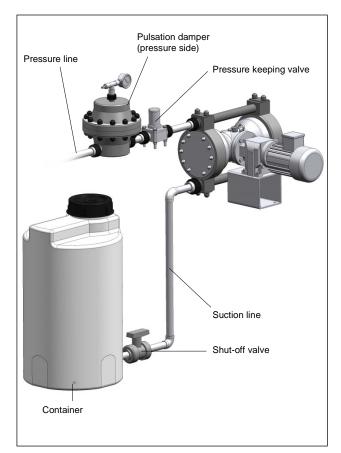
Installing a pulsation damper and a pressure keeping valve
